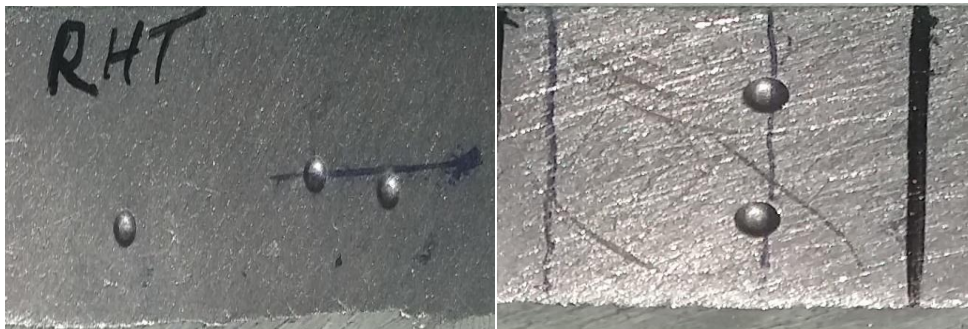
Base Metal Hardness is B87 Figure 17. Weld bead Hardness is B89
